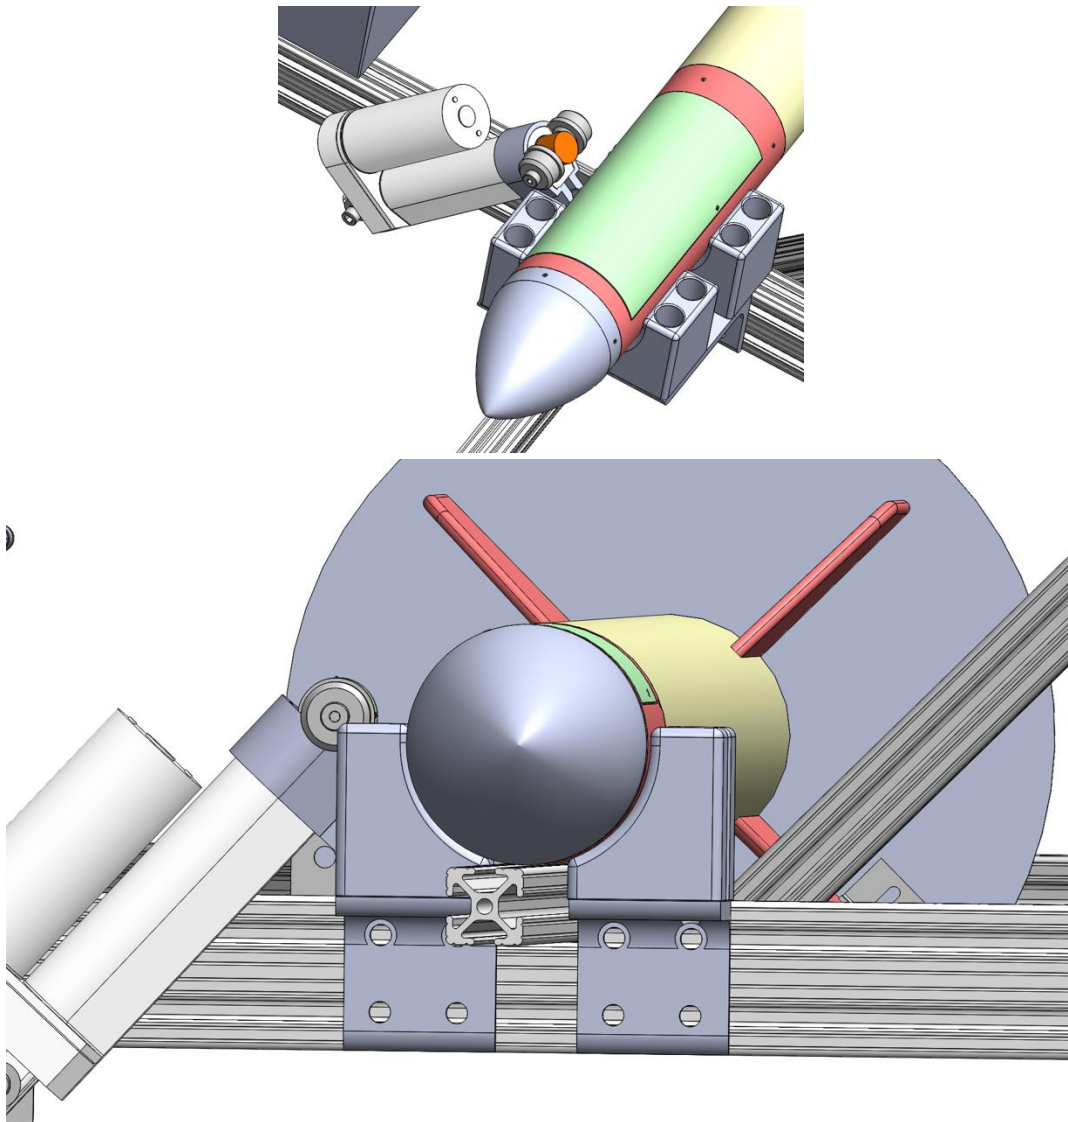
Renderings of body tube stabilizer ("saddle"); above, top oblique view; bottom, end view.
